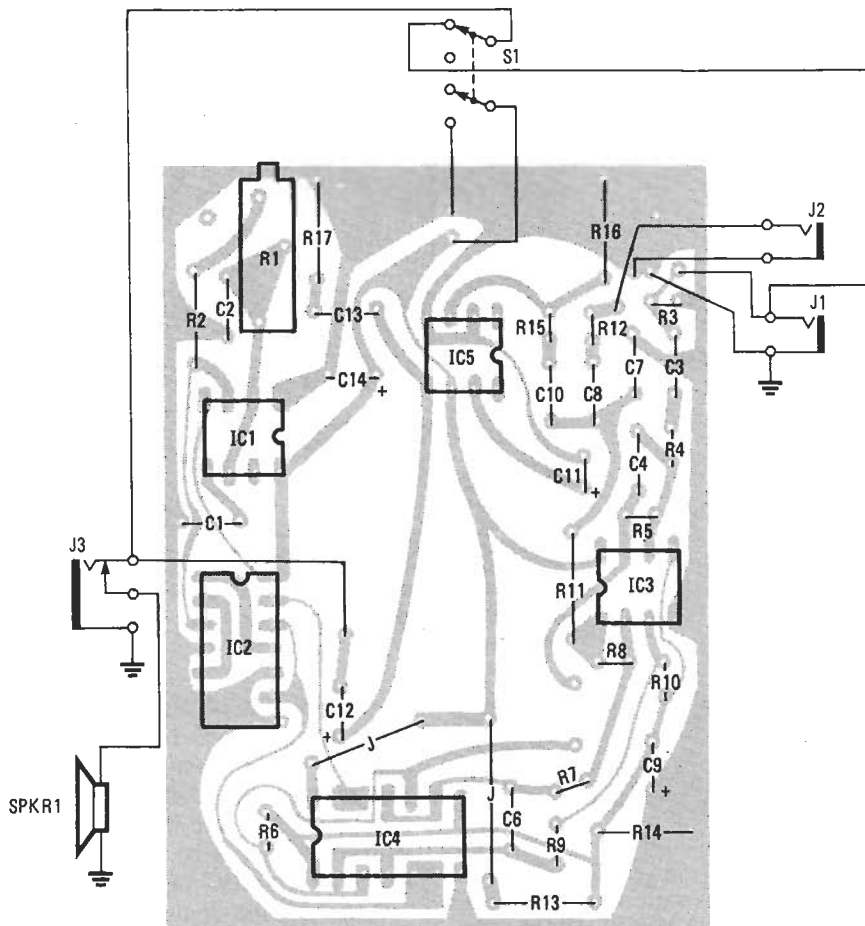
THE PARTS LAYOUT. Keep the center of the board free so it can fit over the speaker.
